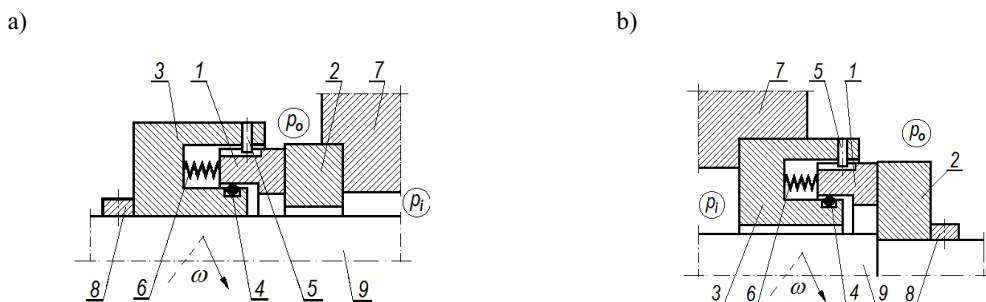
Schematics of the face seals: (a) FMR; (b) FMS: 1, 2- seal rings; 3- housing of the flexibly mounted ring; 4- elastomeric secondary seal; 5- anti-rotation lock; 6- spring; 7- housing of the pump; 8- positive drive device, 9- shaft.
